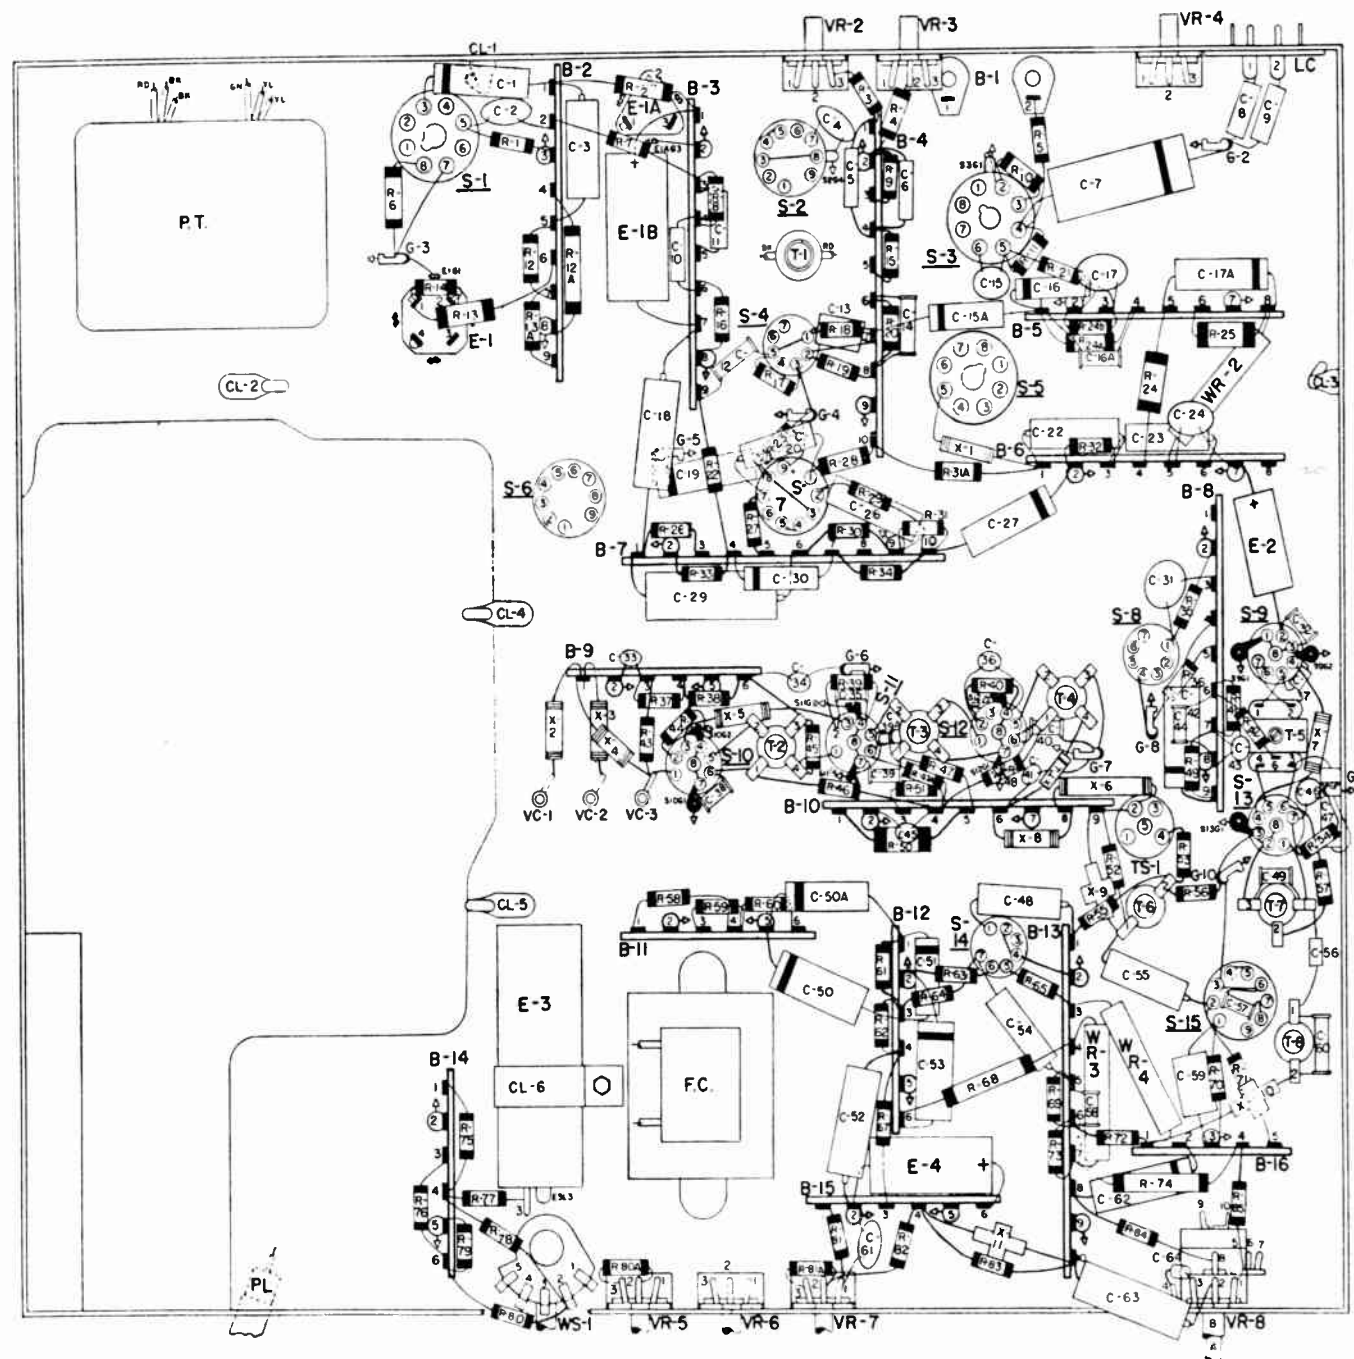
Wiring Diagram, bottom view — TV-354 chassis.
